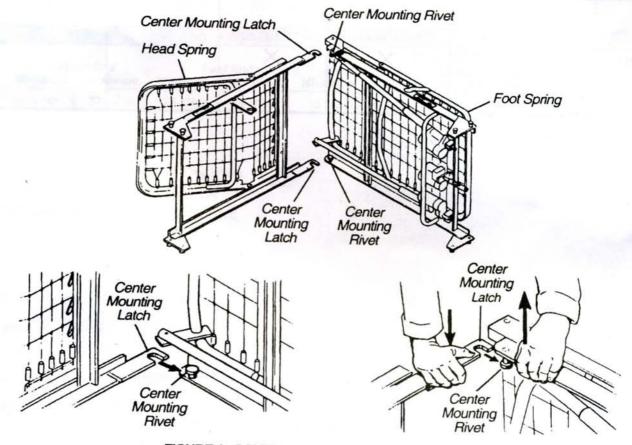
CONNECTING THE SPRING SECTIONS
